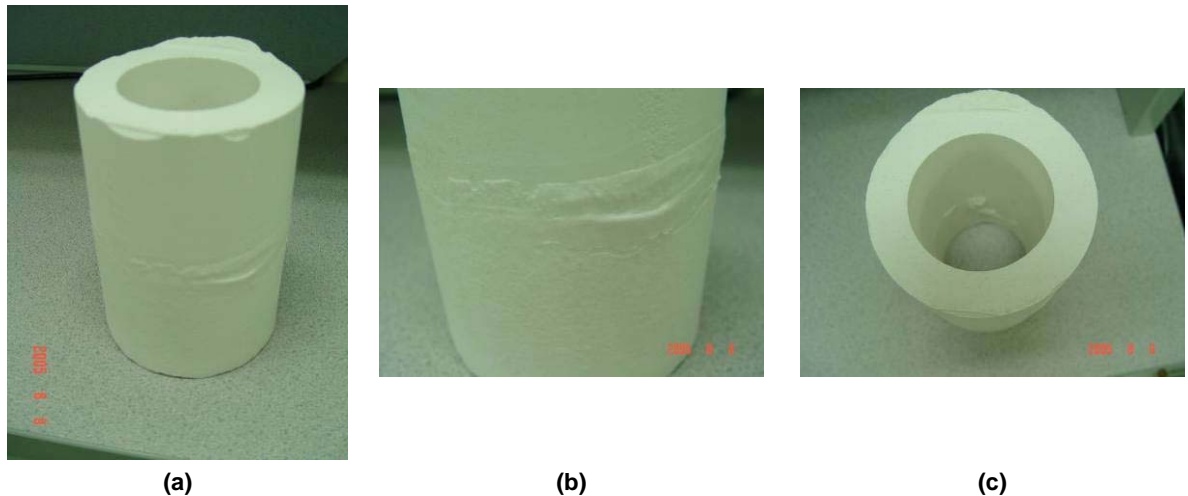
A section of DFS riser tube tested with glaze 1 prepared in methanol.
